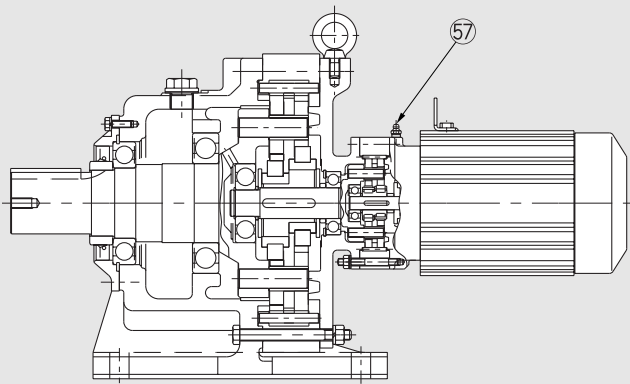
Type CHHM (Horizontal Gearmotor)
